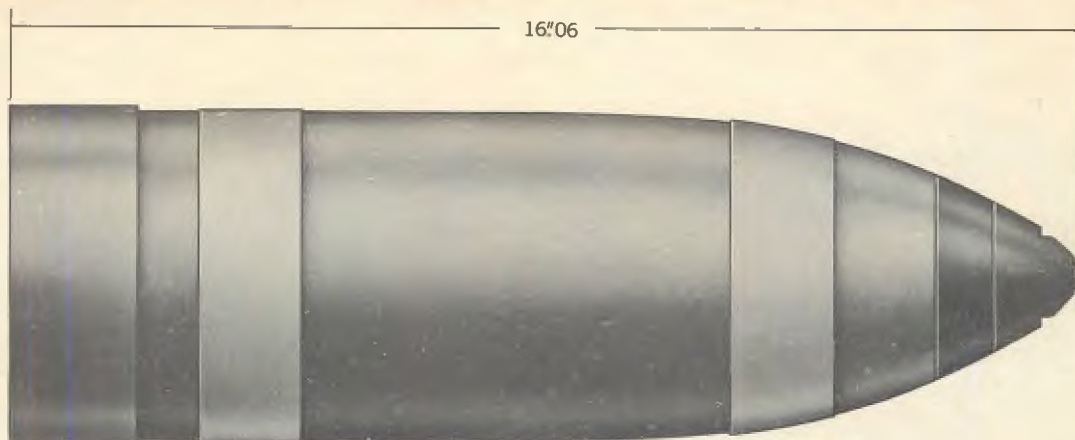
5.0-Inch Rocket Head Mk 21 Mod 1 (SMOKE-TAR), External View.
